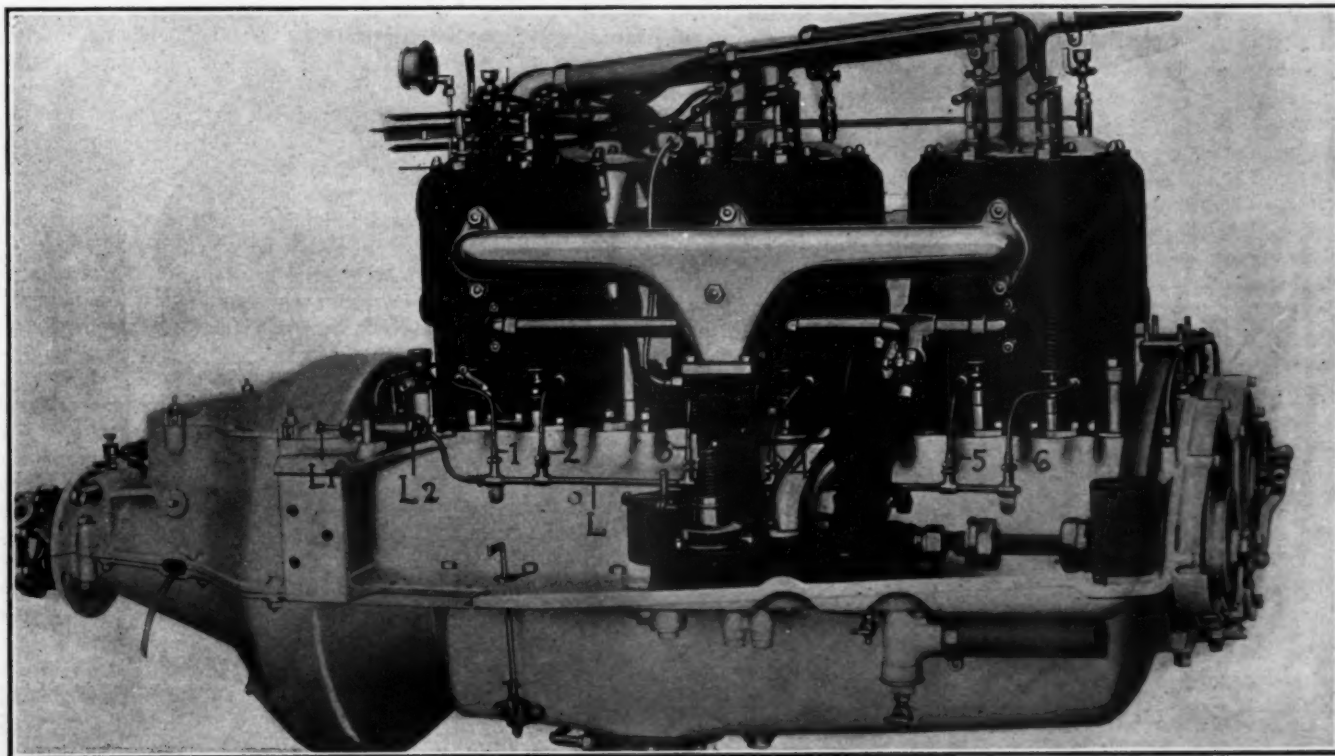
Intake side of Packard six motor, showing auxiliary oiling system made up of distributing oil lead L with branches 1, 2, 3, 4, 5 and 6 to the cylinder walls. Also button L1 for interconnection with throttle control and L2 oil check valve
